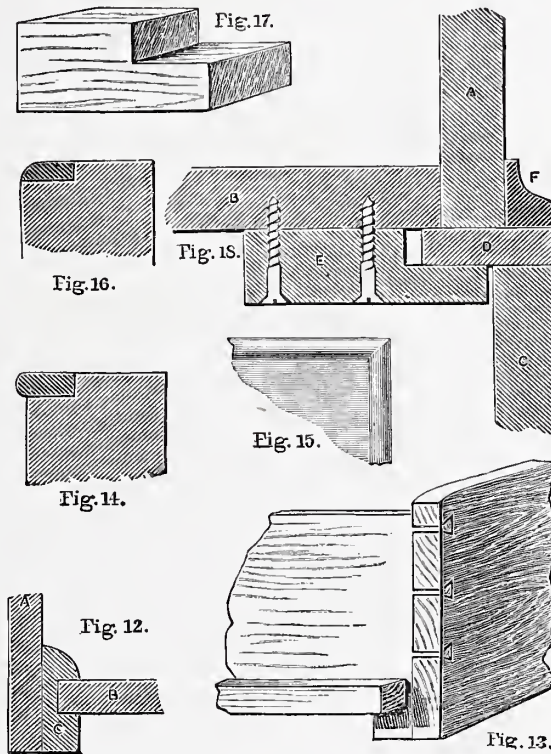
Fitting of Drawer Bottom. Fig. 13.—Back of Drawer. Figs. 14, 15, 16.—Beadings for Drawer Fronts. Fig. 17.—Cleat. Fig. 18.—Section of Plinth Fastening.
